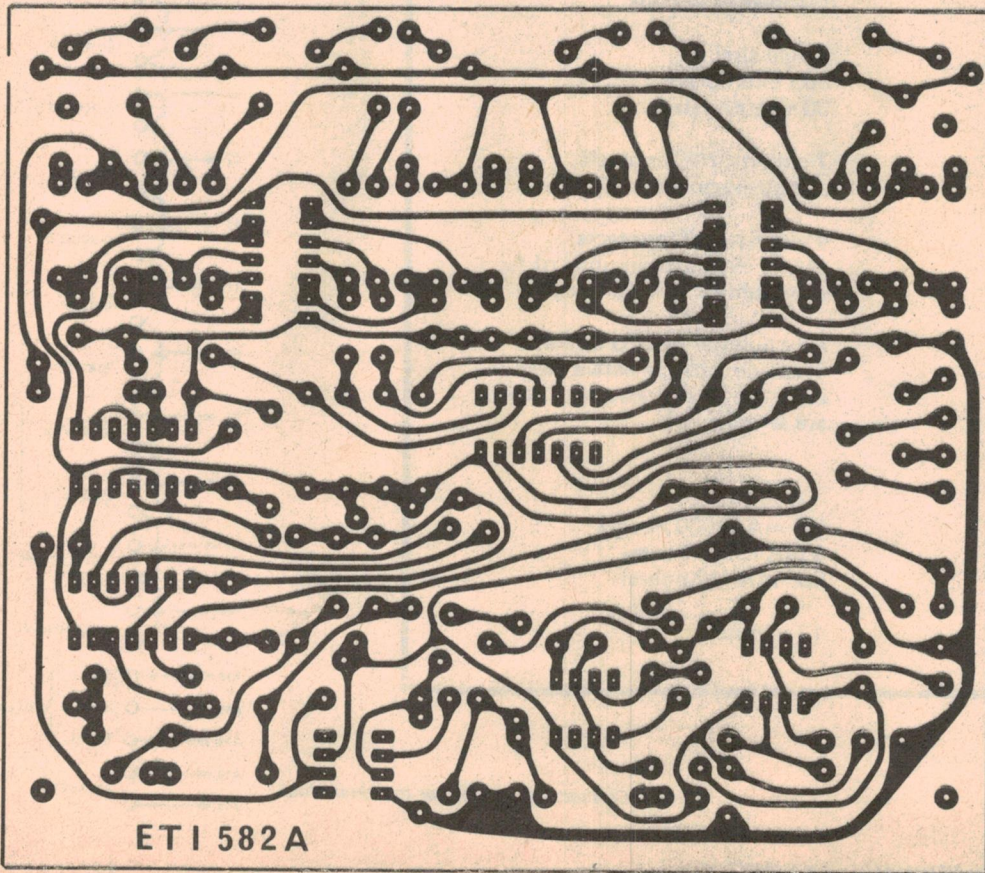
PC board layout of board 'A'. Full size 130 x 115 mm.
